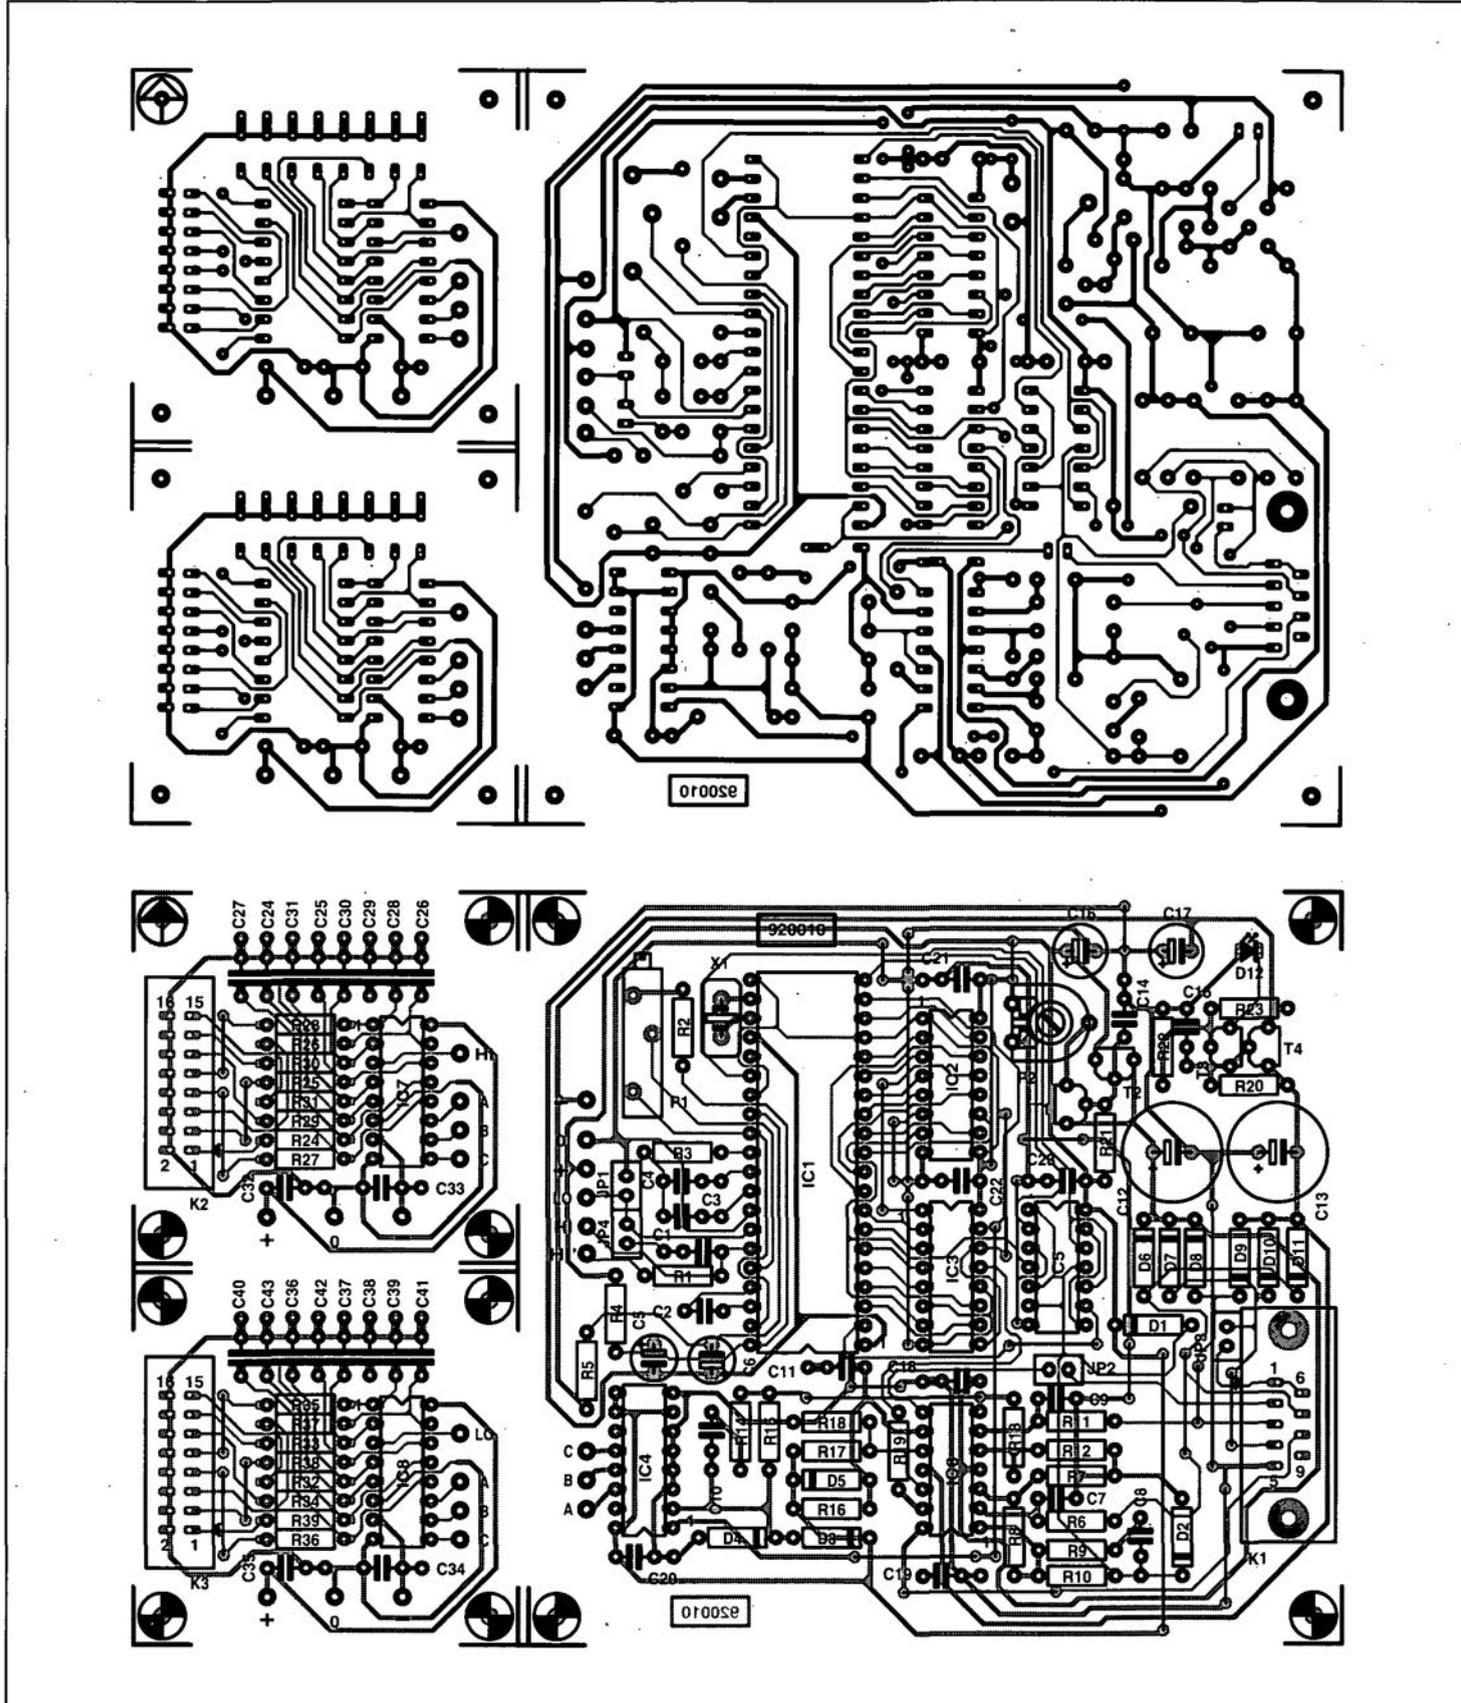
Single-sided printed circuit board (track layout and component mounting plan) for the AD232.
